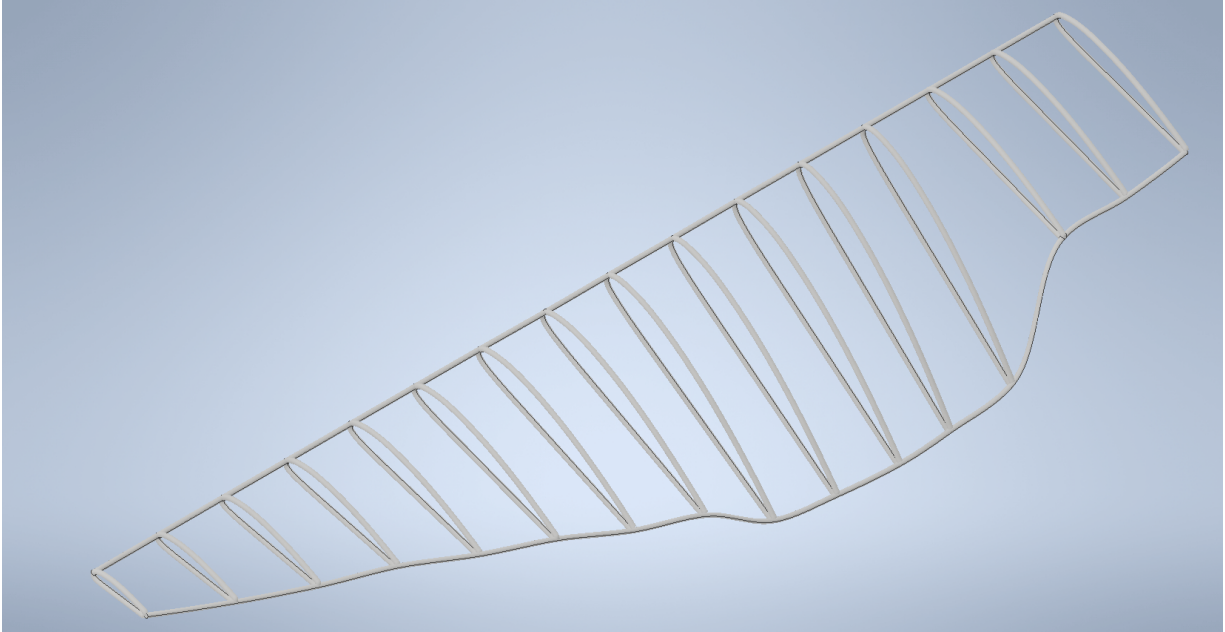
Isometric view showing top side of the wireframe propeller blade
